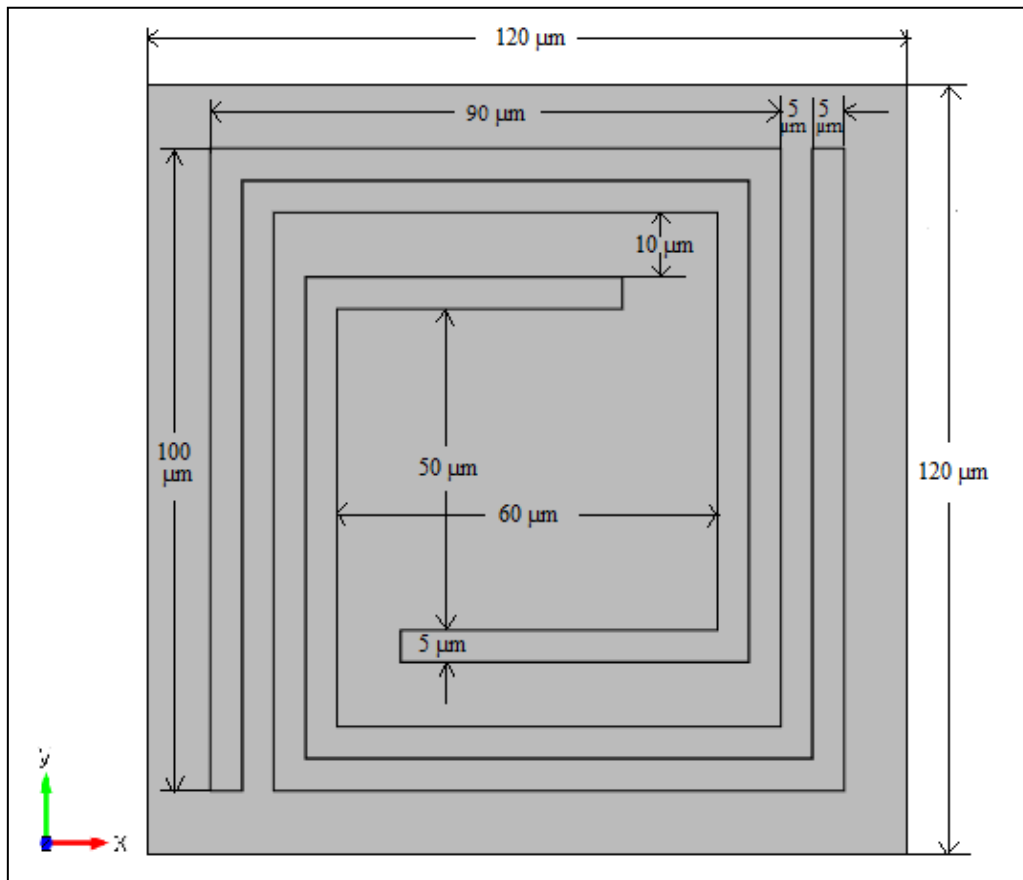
2D view with dimensions of Poly-Si based changed width modified spiral geometry
